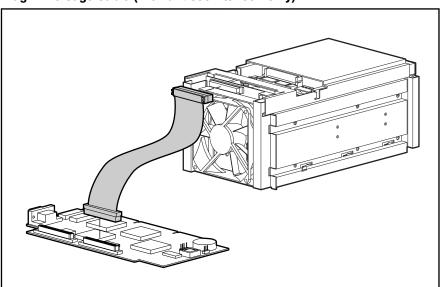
Hot-Plug Drive Cage Cable Diagram (Spares Part Number 298864-001)
